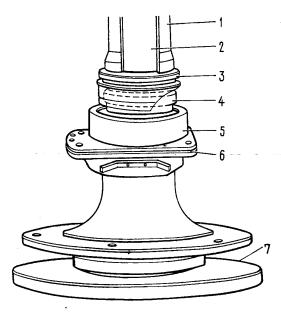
Press-Fitting Axle-Shaft Bearing Lock-ring:
